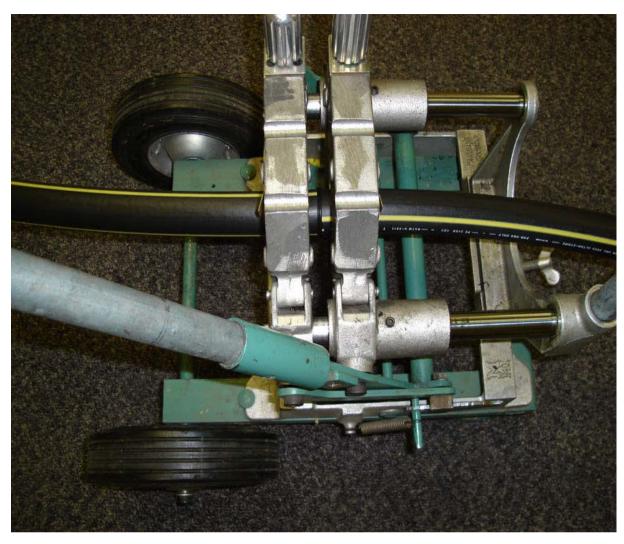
Alignment of Coiled Pipe Ends Through a Butt Fusion Machine
